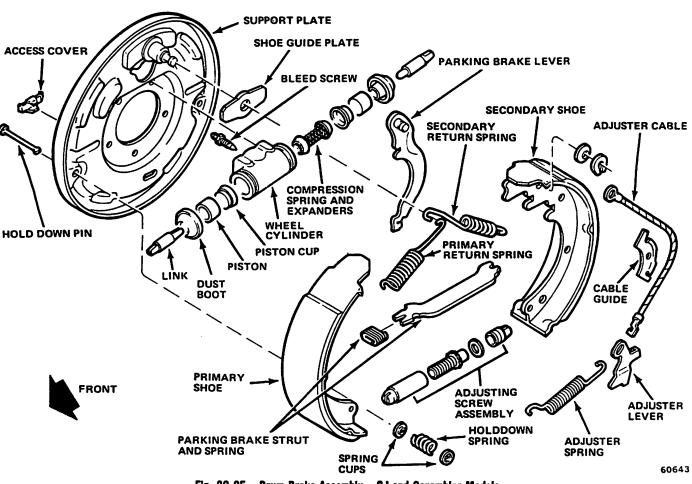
G-25 Drum Brake Assembly-CJ and Scrambler Models
